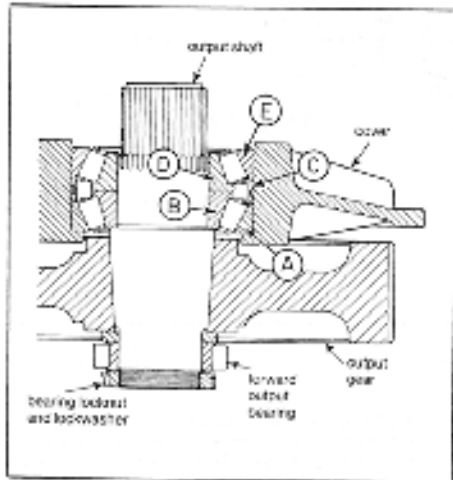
Sub-assembly including output gear and shaft, cover and bearings.
